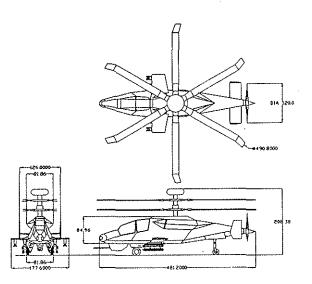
A Coaxial Compound HSHMR 3 View Drawings
